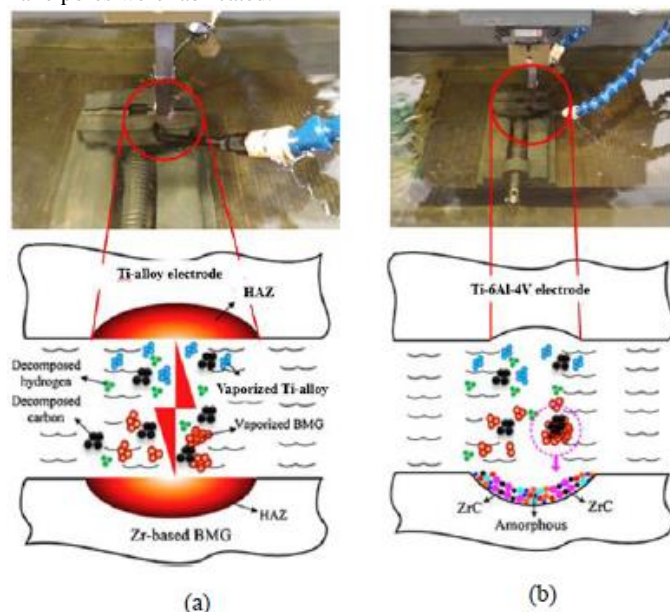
PMEDM gap (a) discharge time: melting and vaporization of workpiece and tool materials (b) off-time: deposition of the carbide layer on the workpiece surface.
